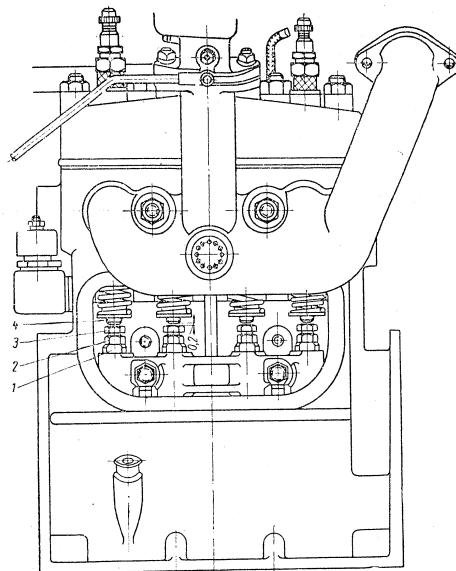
Starting Engine Valve Clearance Adjustment:
